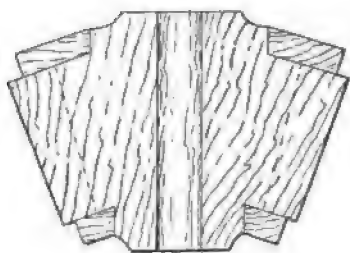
Dummy Pattern for Machine Moulding, half shrouded.
